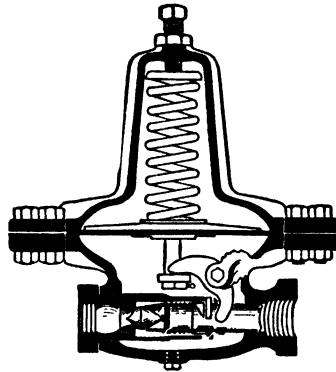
Inner valve has streamlined design. (Courtesy of A. W. Cash Co.)
